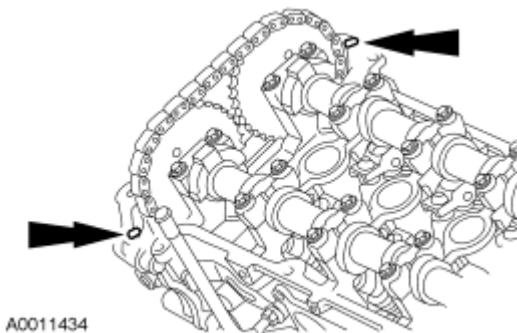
Applying Silicone Gasket And Sealant At Cylinder Head To Front Cover Mating Surface
